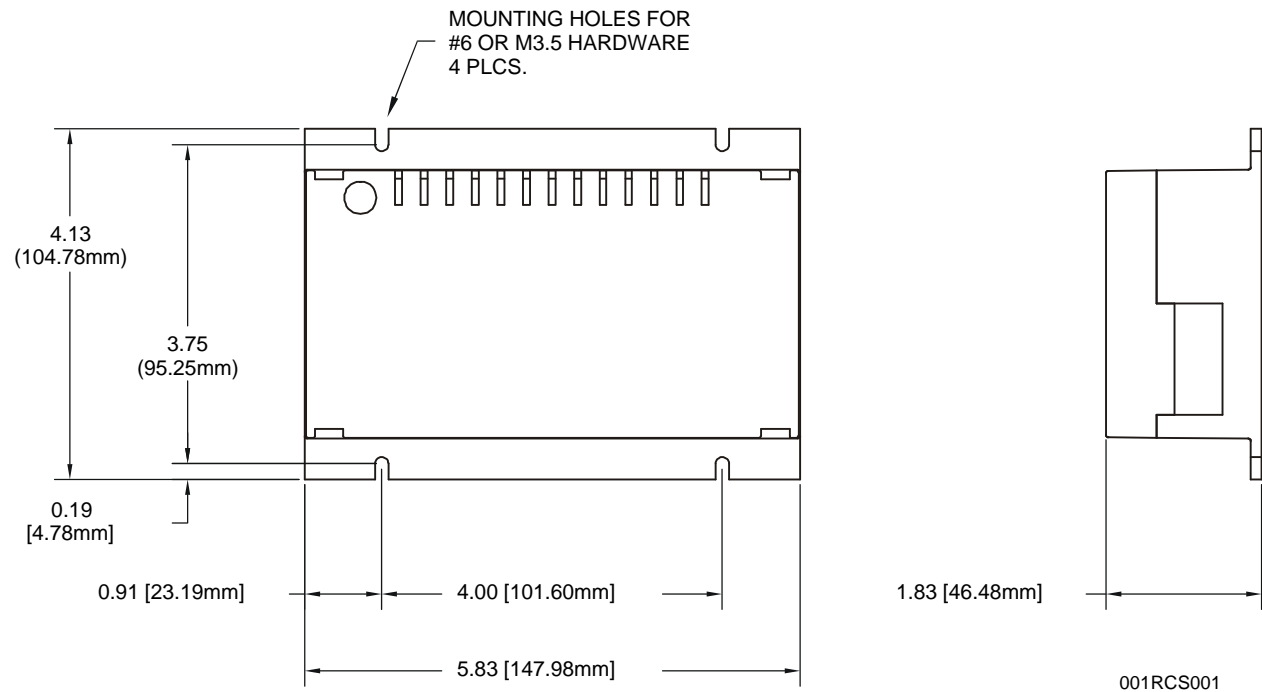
MiniRCS Dimensions / Mounting Holes and MiniRCS Side View
